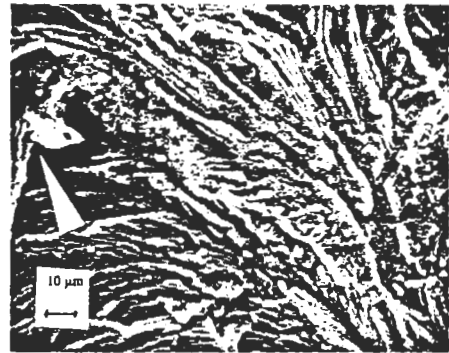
Fractograph of fatigue fracture surface.
